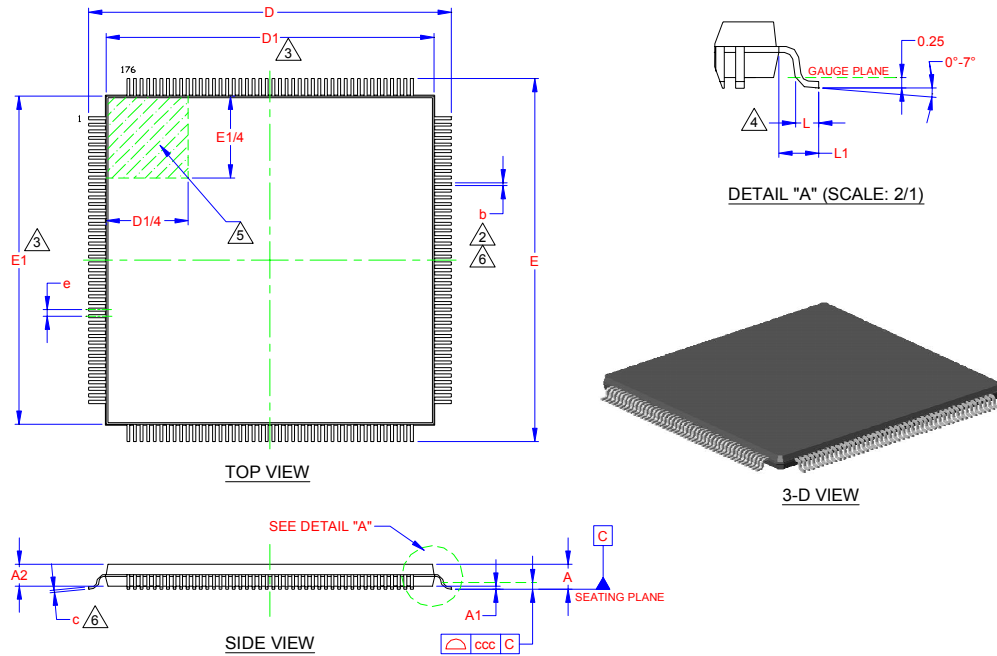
176-Pin TQFP Package Outline, 20X20X1.4 Body, 0.4 mm Footprint
